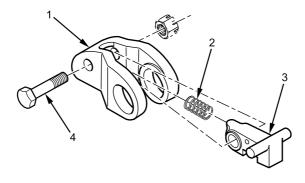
Towing Pintle Hook Upper Jaw Assembly.
